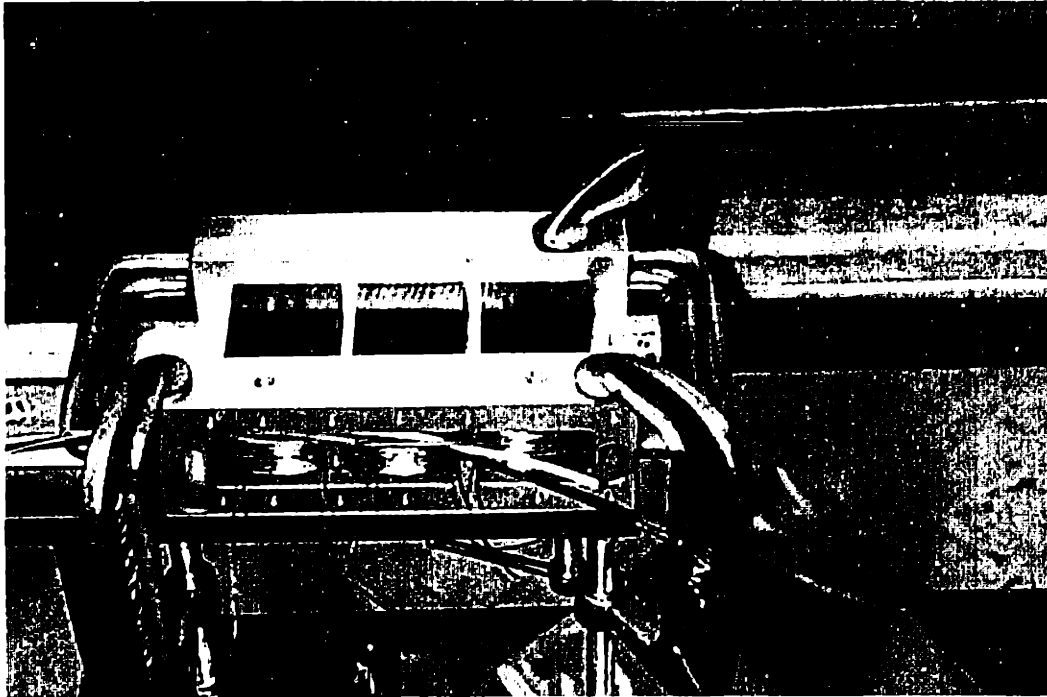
The coils, upper and lower housings, and copper tubes are being epoxied together. The wiring of the coils is not yet complete.
